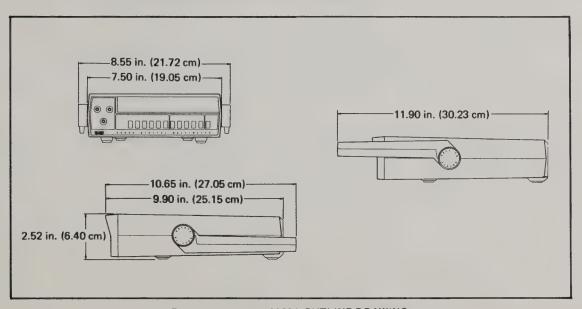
MODEL 8000A OUTLINE DRAWING.
